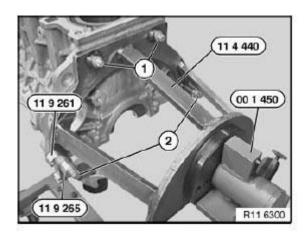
Mounting Engine With Special Tool 11 3 370 Courtesy of BMW OF NORTH AMERICA, INC.
